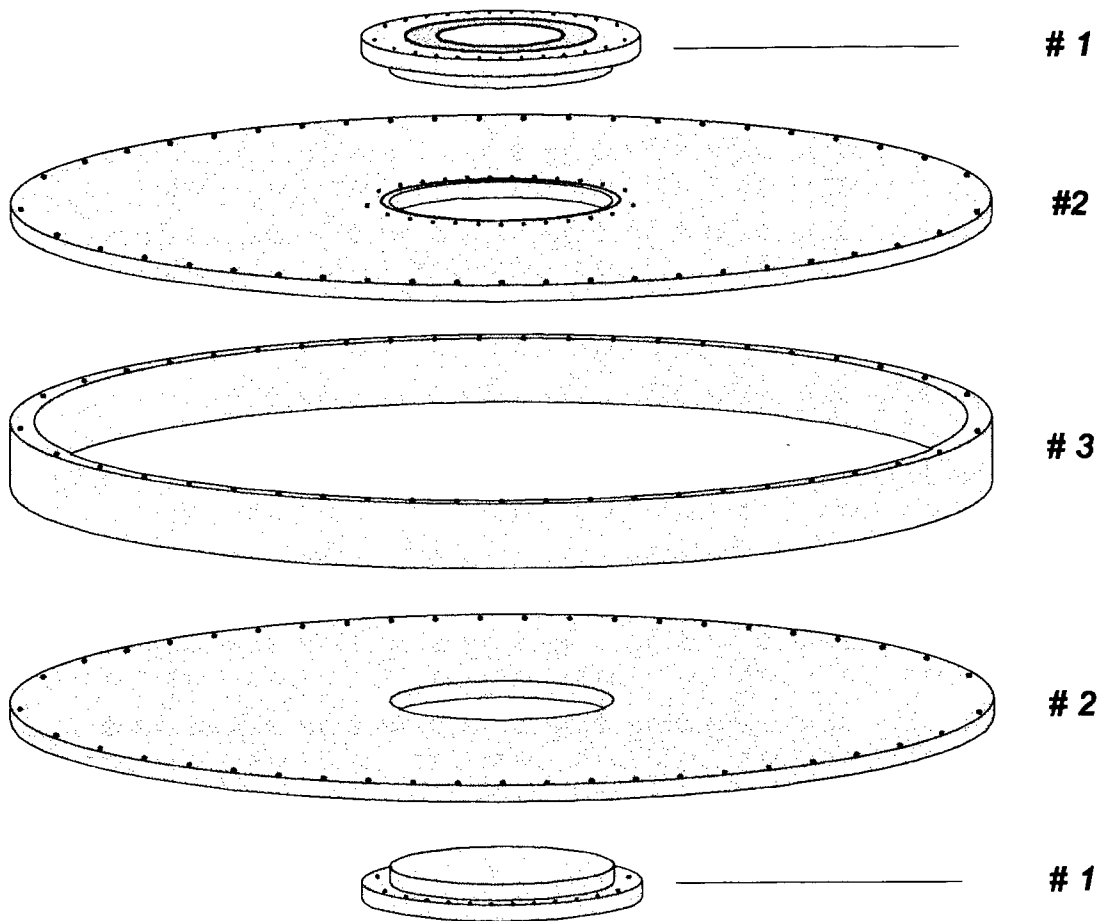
Unassembled view of the resonator used for the large radial wave thermoacoustic prime mover. Pieces #1 are stainless steel caps which allow access to the inner thermoacoustic elements. Pieces #2 and #3 are plain carbon steel.
